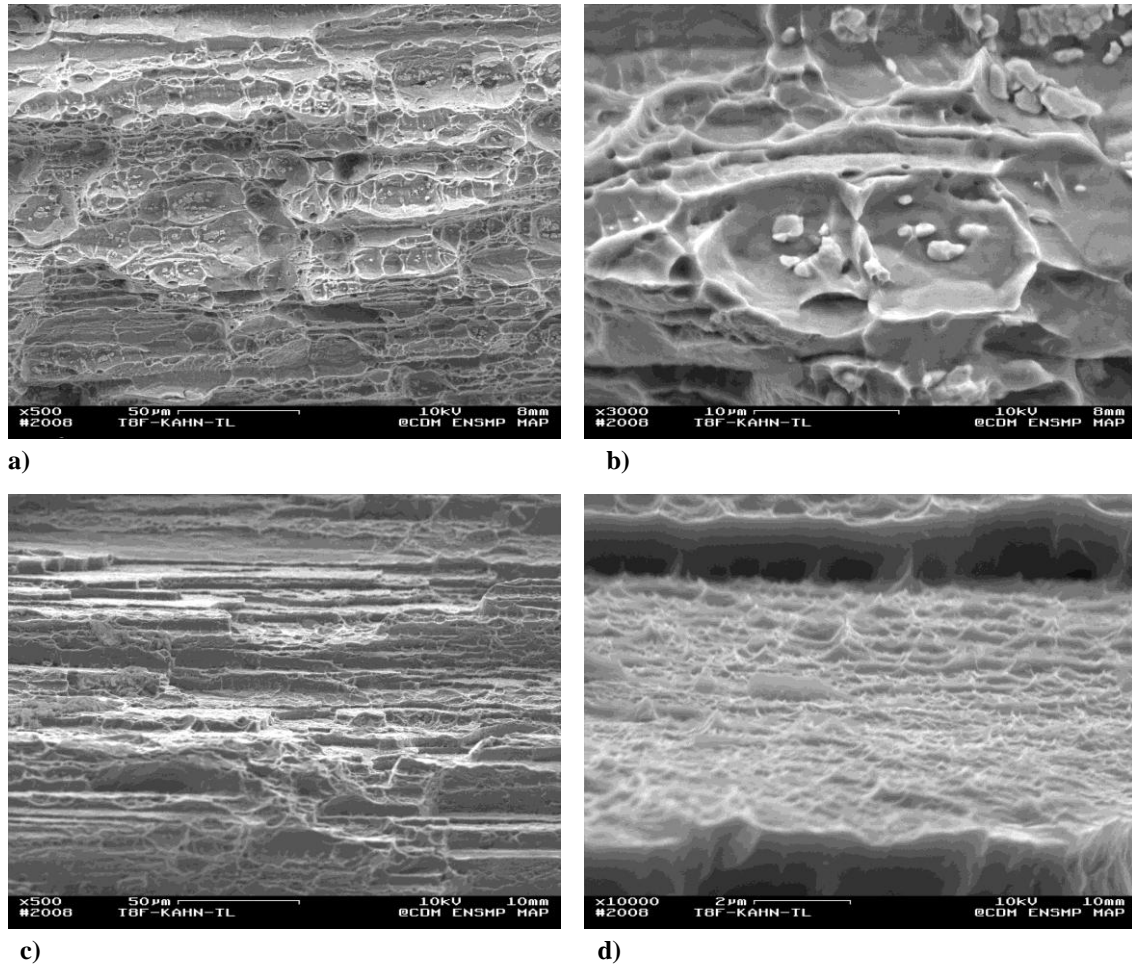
Large dimples in triangular zone (a) and (b), micro-dimples in slanted zone (c) and (d) in Kahn sample for 2198 T8F_6 sheet
